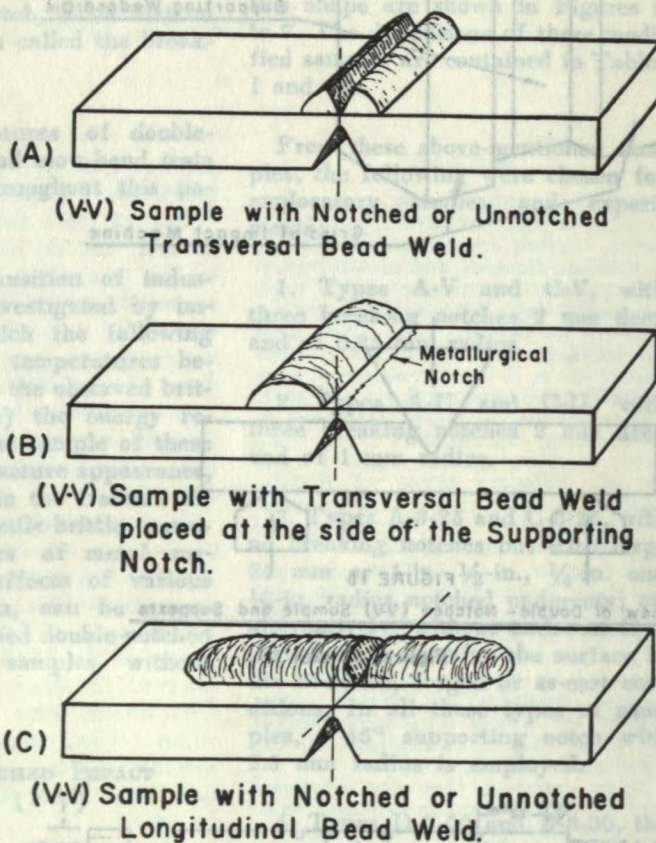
Tension-bending double-notched (V-V) slow bend and impact samples for tests of welded plates.
